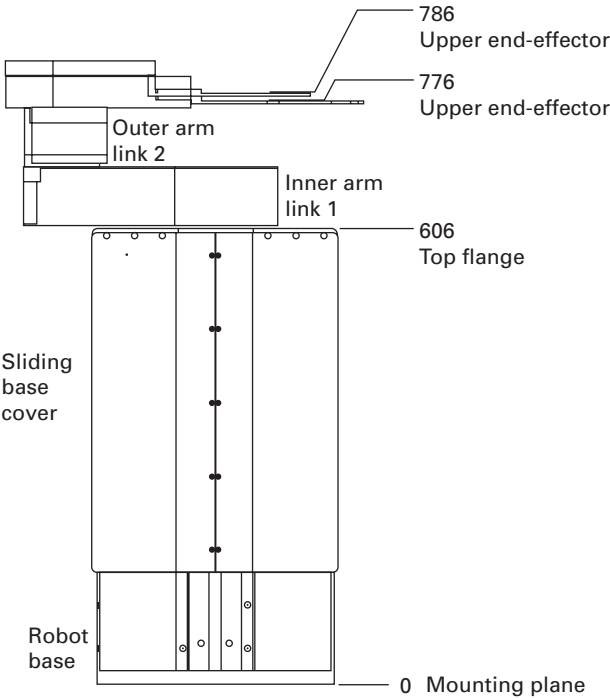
Side view of bottom mounted atmospheric wafer handling robot in Example 3.2. Dimensions are in mm. Source: Cymechs Corp.
